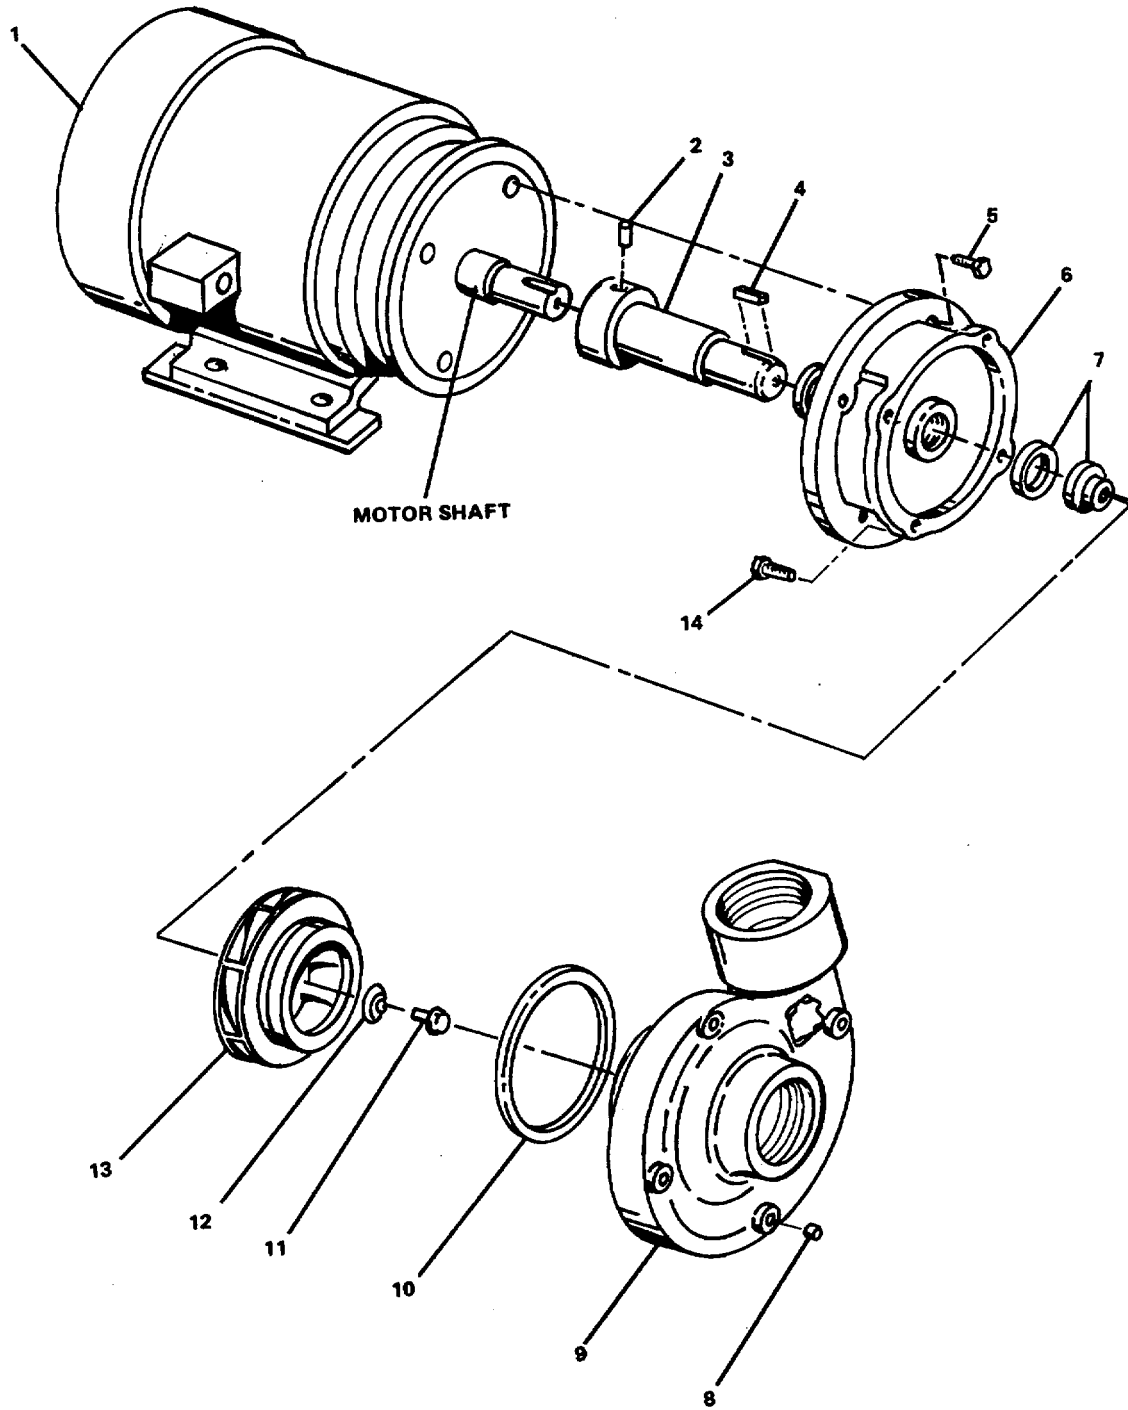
Rotary Pump (Reduction Gear Cooling Water).
